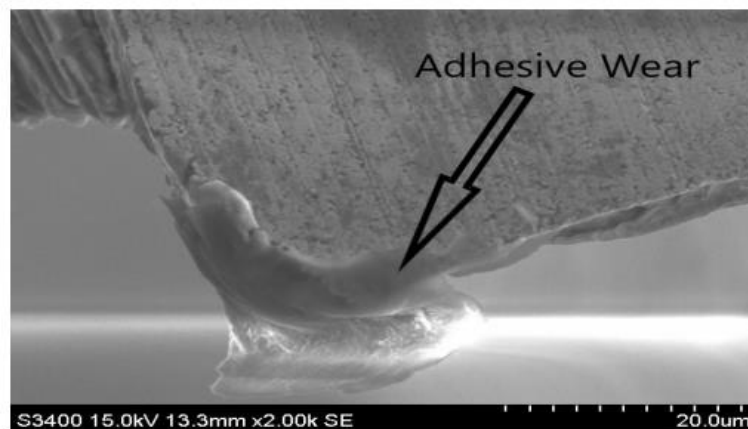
Adhesive wear on a coated tool. Reproduced from [87].
